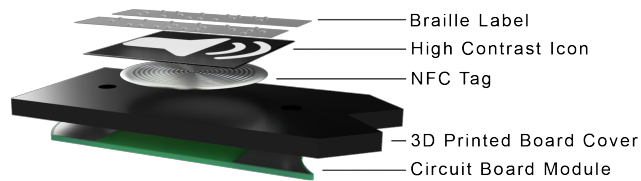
Exploded view showing the layered components added to an individual circuit board module.
